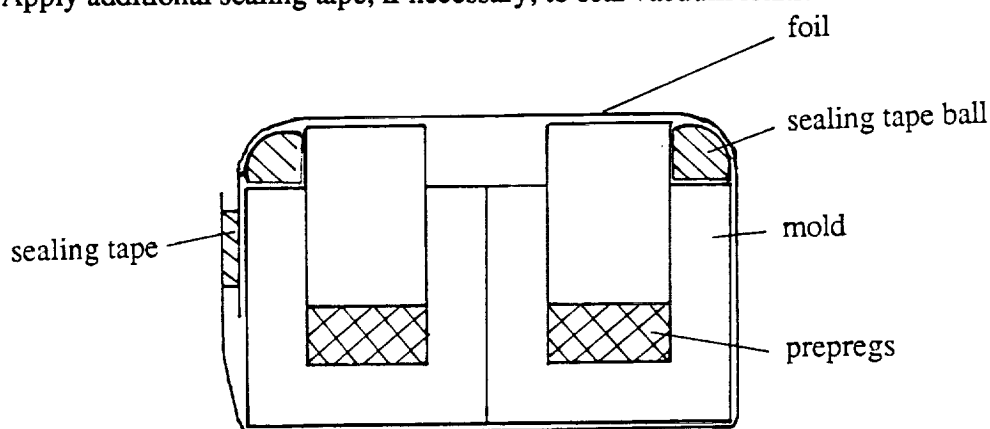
Illustration to vacuum bagging - step 6 (end view).
